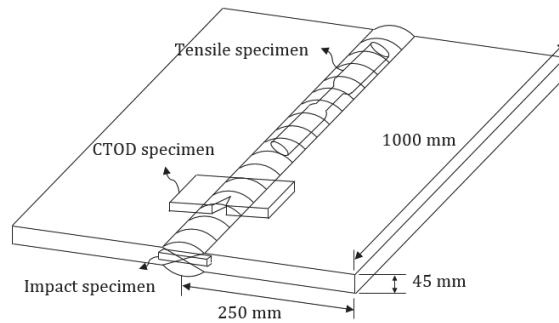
Schematic diagram of the welded panel and test specimen.
